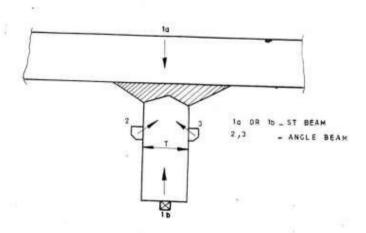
SCANNING DIRECTION FOR 'T' WELDS (ATTACHMENT)
